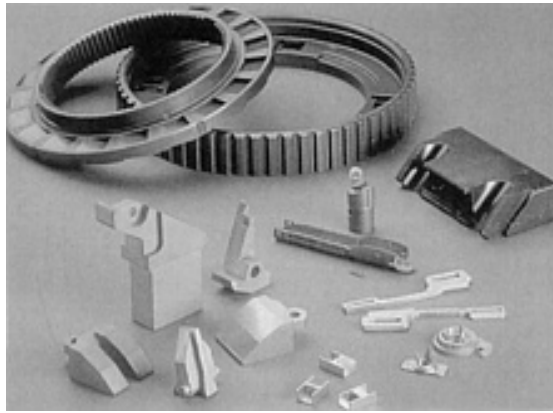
1997 Award of distinction winners. Left to right, foreground: Five stainless steel mortise lock parts; three opto holders; and metal injection molded latch door, gear, and racks. Center: Metal injection molded link, receiver, and clevis; and padlock body. Background: Notch plate and pocket plate
